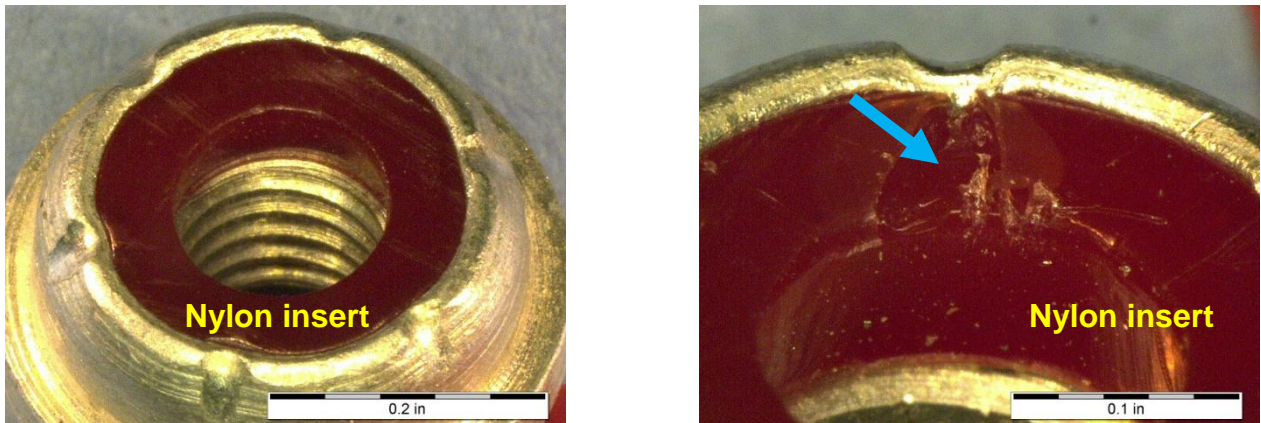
The head of an unused locknut with a nylon insert, part number 22ND8-02, (left) and a closer view of the insert after removal of material for FTIR analysis (right).
